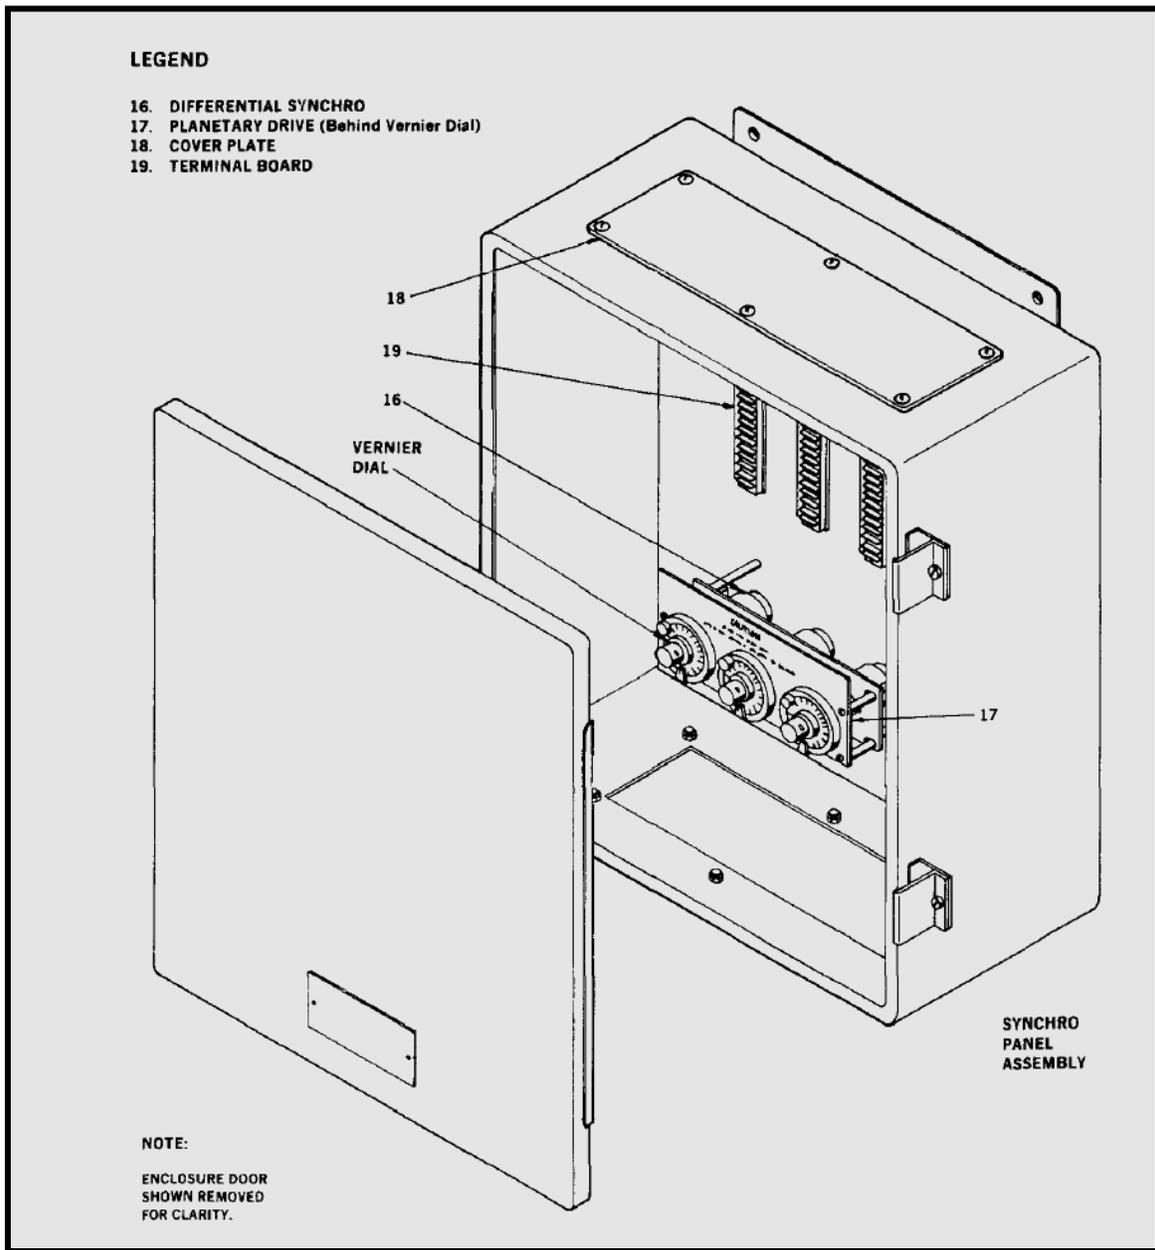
Dual Station BITE Test Panel Assembly and Synchro Panel Assembly. (Sheet 2 of 2).
